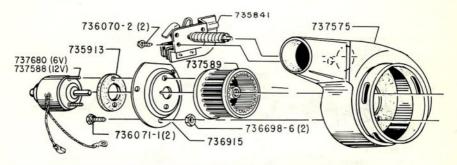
VENTILATING BLOWER ASSEMBLY 737587-737681 AND SUBASSEMBLY 737585-737682 MODEL 8349 SERIES
